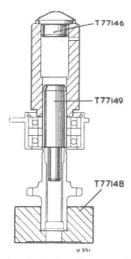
Pressing the hydraulic pump drive bearing housing on to the hydraulic pump drive gear
